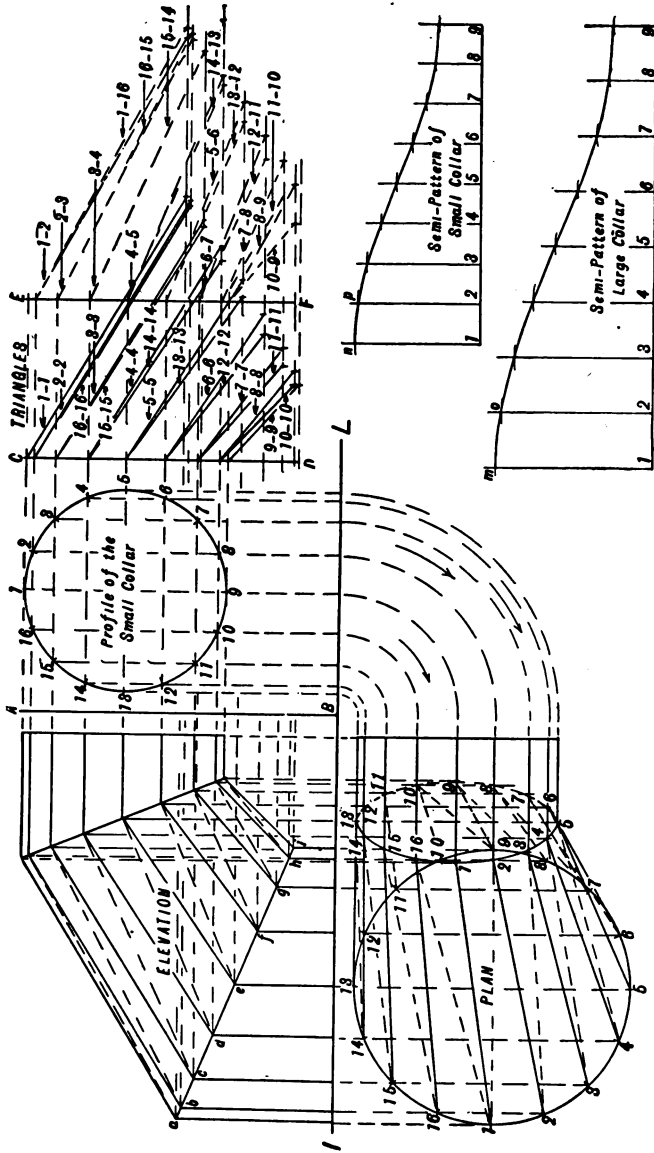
Plan, Elevation, Diagram of Triangles and Semi-patterns of Round Collars.
